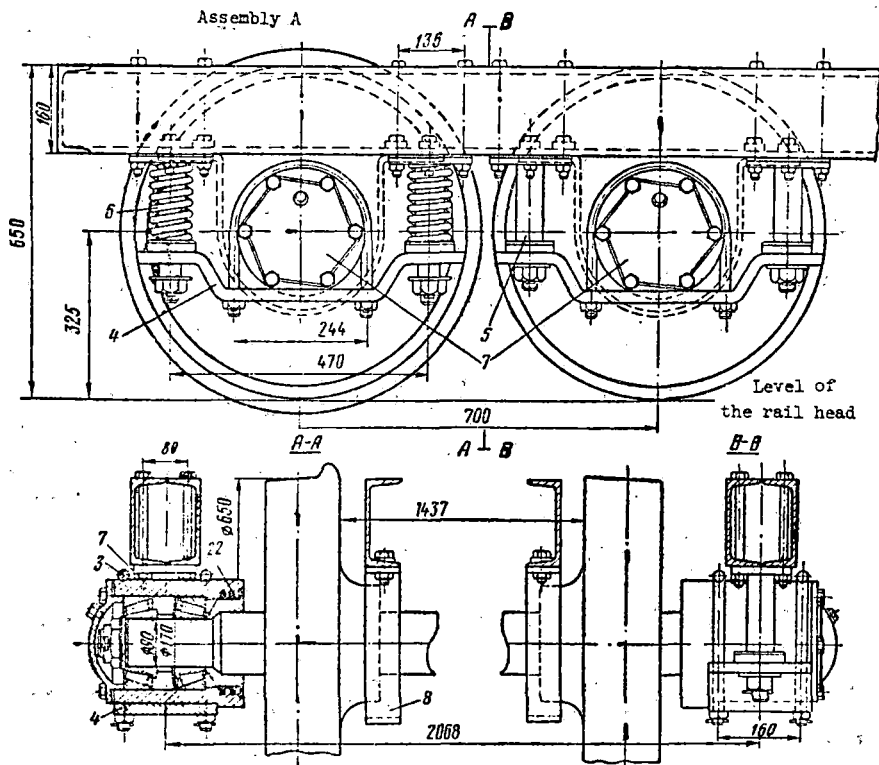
Mounting of the wheel pairs for the inductor carriage.
